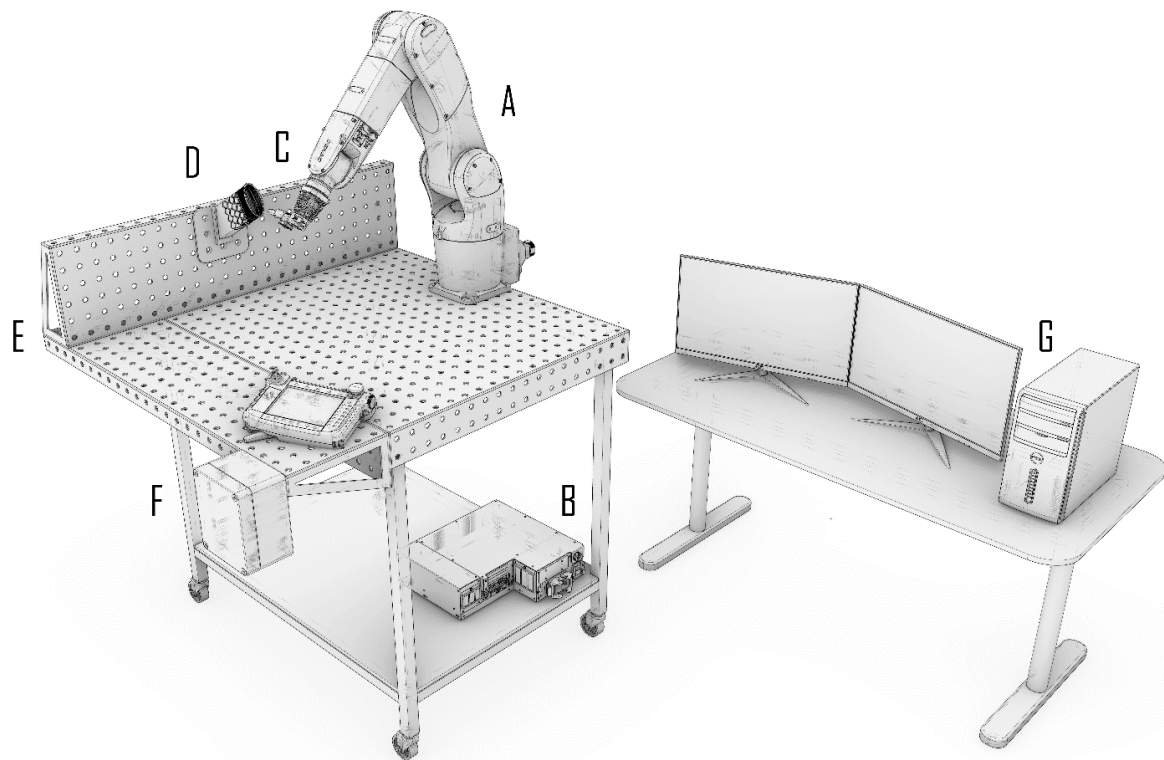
Schematic representation of fabrication process. (A) Six-axis robot arm. (B) Robotic Control system. (C) Extruder tool head. (D) In-situ element and 3d printed structure. (E) Fabrication Table. (F) Extruder control box. (G) Control system
